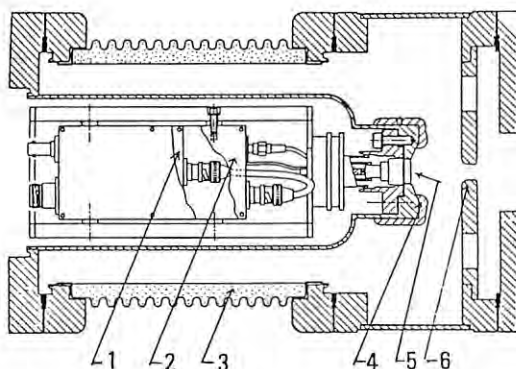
Electron gun assembly. (1) O/E module, (2) grid pulser, (3) ceramic insulator, (4) focusing electrode, (5) cathode grid assembly and (6) anode.
